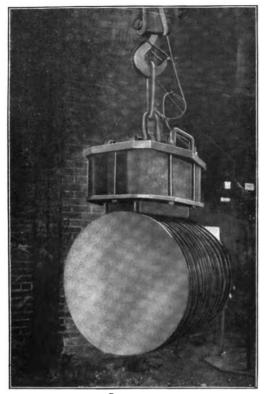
Magnet Limiting Boiler Heads on Edge.
